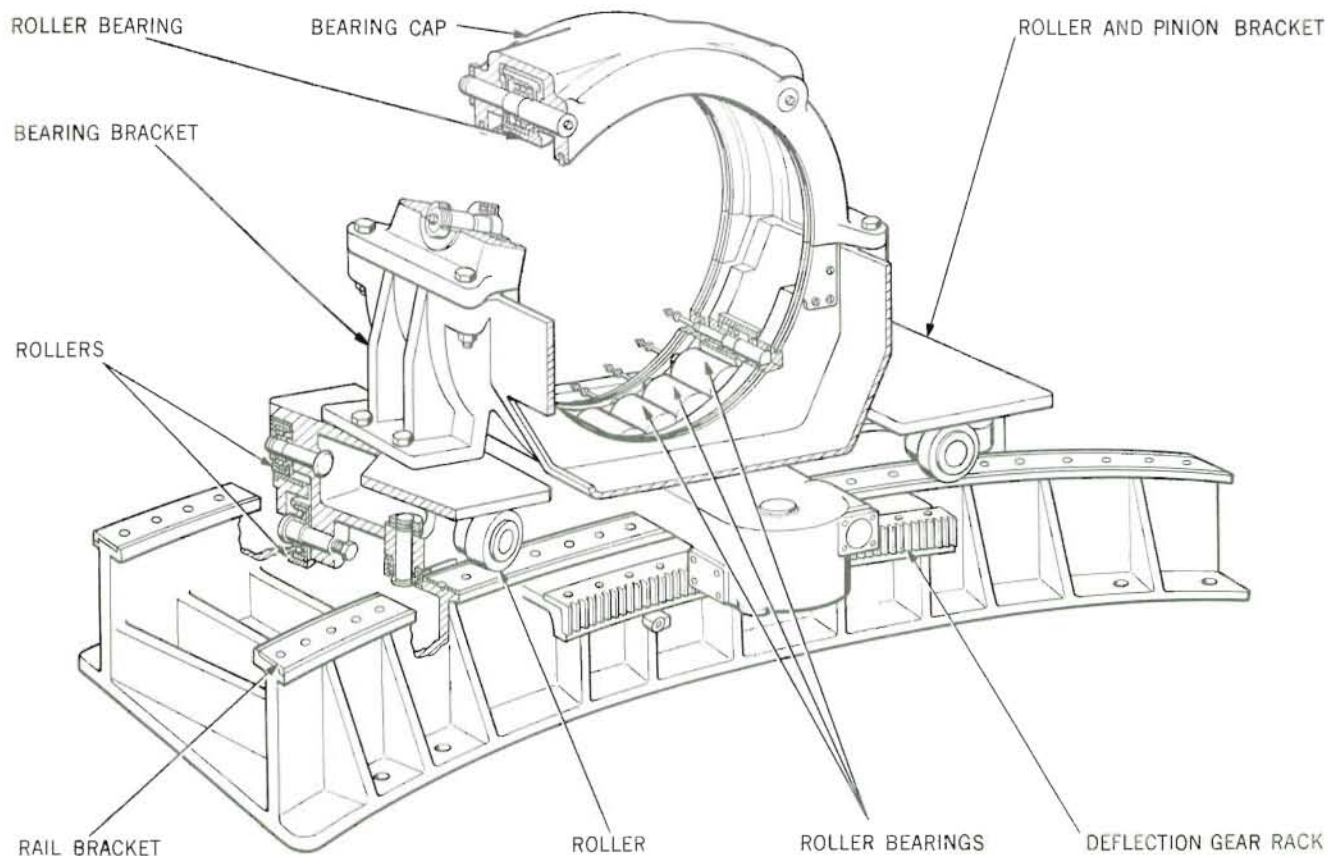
Left Rail Bracket and Bearing Assembly, Sectional View.
